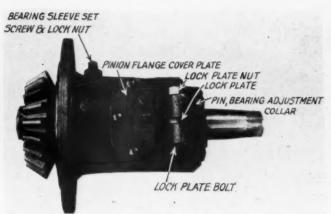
The Pinion Flange Assembly, Having a Set Screw With Lock Nut, the Set Screw Preventing Turning of the Adjusting Collar Shown in Fig. 12
